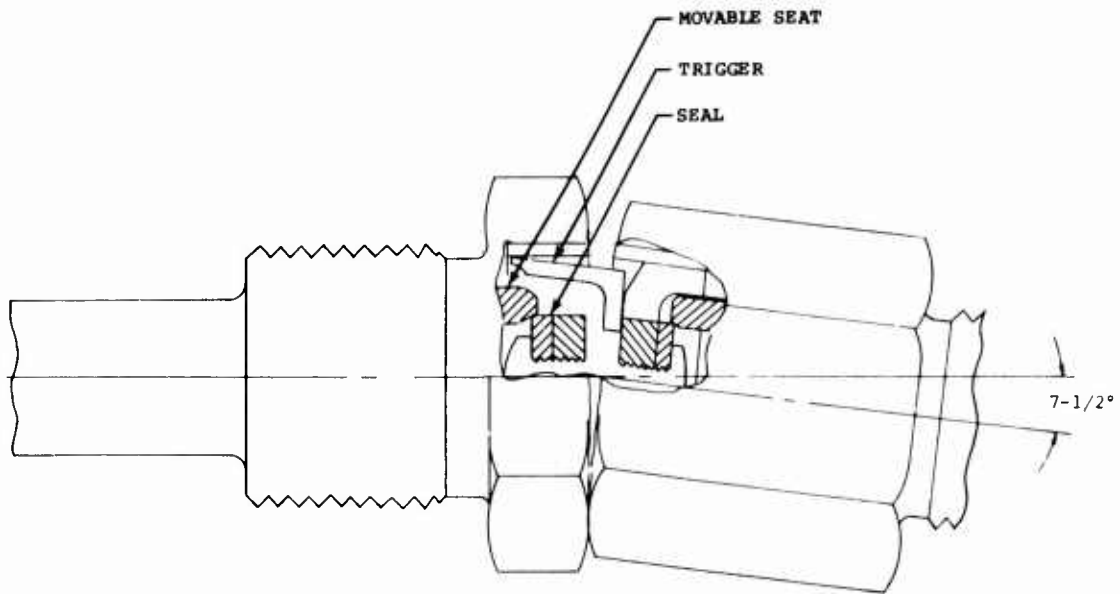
Valve 4 Separation Sequence. (Valve Body Rotated Sufficient Distance to Allow Trigger to Release Seat and Seal.)
